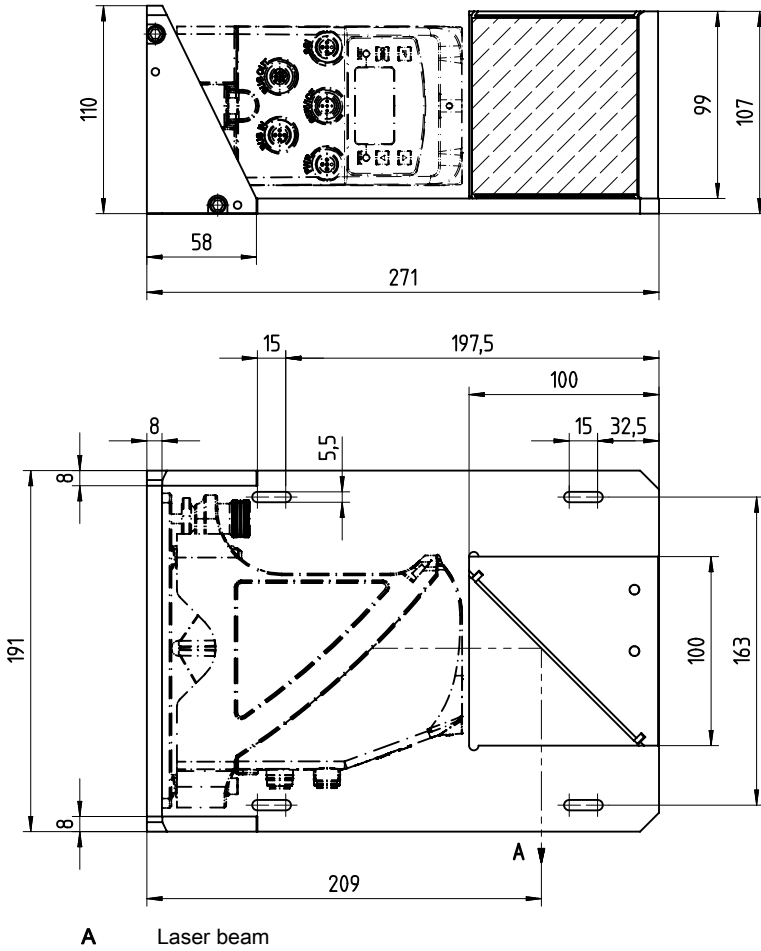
Dimensioned drawing of US AMS 01 deflector unit
